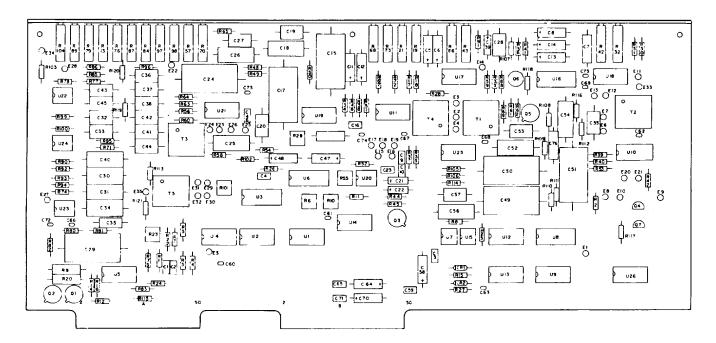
Operations Voice Buffer Circuit Card Assembly, 4A2 Parts Location Diagram
